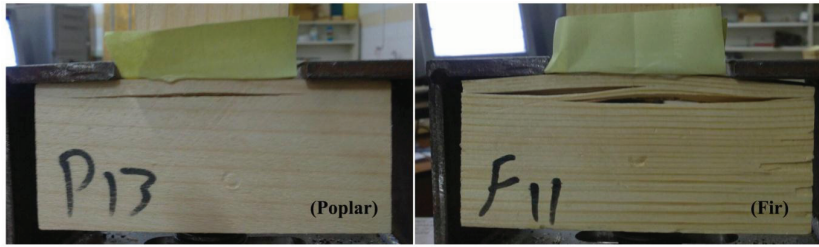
Modulus of failures of M< joint specimens made of poplar and fir.
